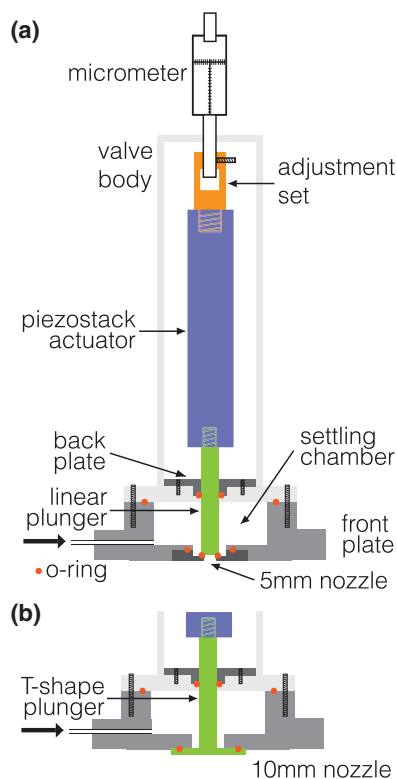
Cut-away view of the valve assembly. The piezostack actuator (blue) is mounted in a stainless steel valve body (light grey). The position of the plunger (green), either linear (a) or T-shaped (b), is adjusted by a micrometer. The different o-ring positions are symbolized by red circles. In particular, the plunger is sealed at two positions, i.e., by an o-ring at the nozzle itself, and by another o-ring fixed at the top of the plunger with its tightness adjusted by varying the pressure exerted by the back plate.
